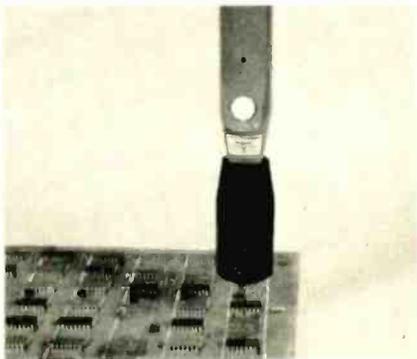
PC DRILL attachment for Wahl's Iso-Tip soldering iron quickly cleans holes or makes new ones.
